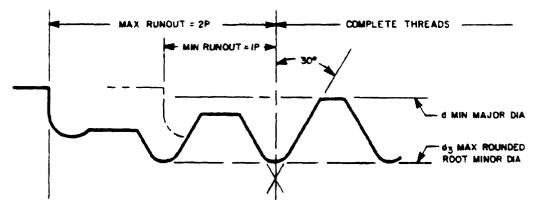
FULL SHANK FASTENER - STANDARD DIAMETER,
